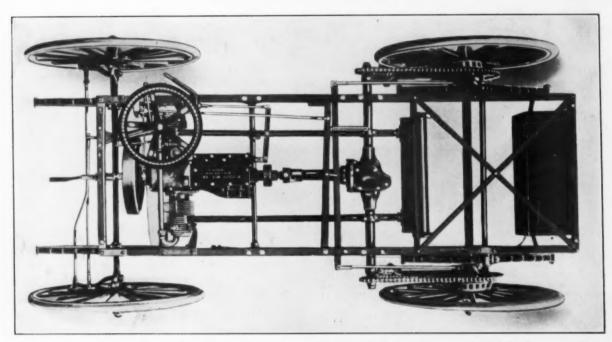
Top View of Mercury Chassis; showing the location of the two-cylinder, four-cycle, air-cooled motor, with which the planetary transmission is a unit. The jack shaft is 1% in. diameter, the propeller shaft 1¼ in. and the master bevel and driving pinion are 1 in. face
